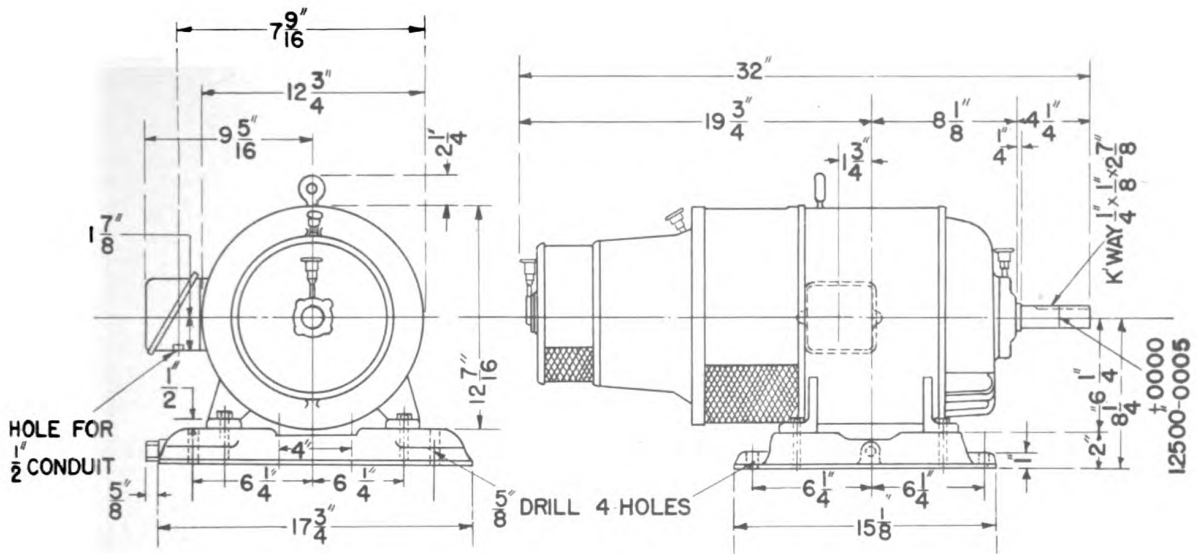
CONTROL UNIT RM-7-B, OUTLINE DIMENSIONAL SKETCH
